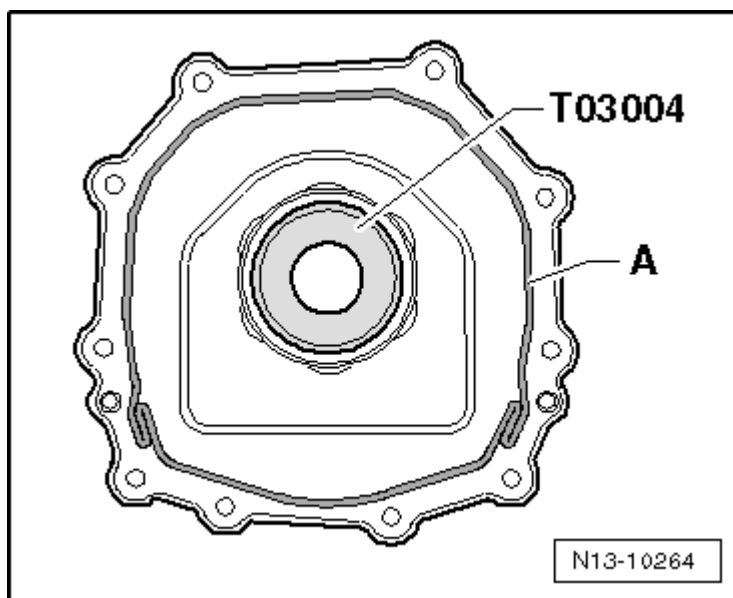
Applying Sealant Bead Into Groove Of Sealing Flange
